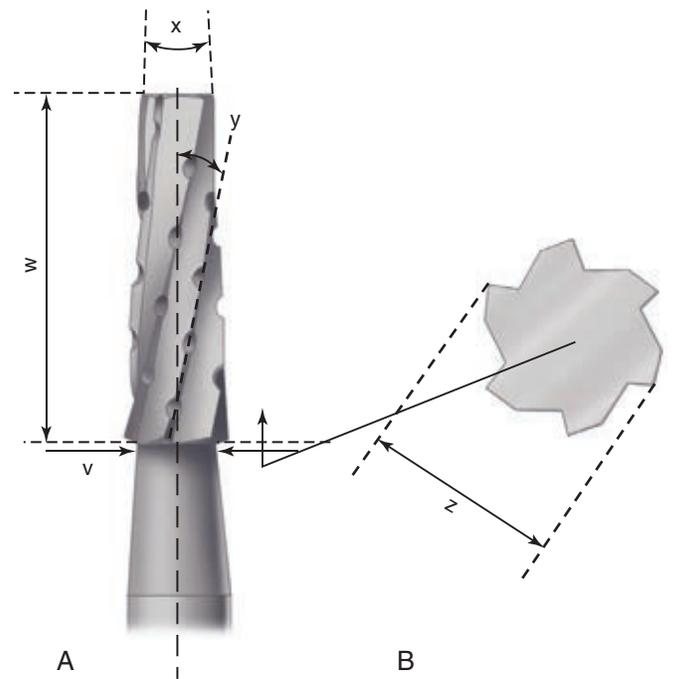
Design features of bur heads (illustrated using No. 701 bur). A, Lateral view—neck diameter (v), head length (w), taper angle (x), and spiral angle (y). B, End view—head diameter (z).
